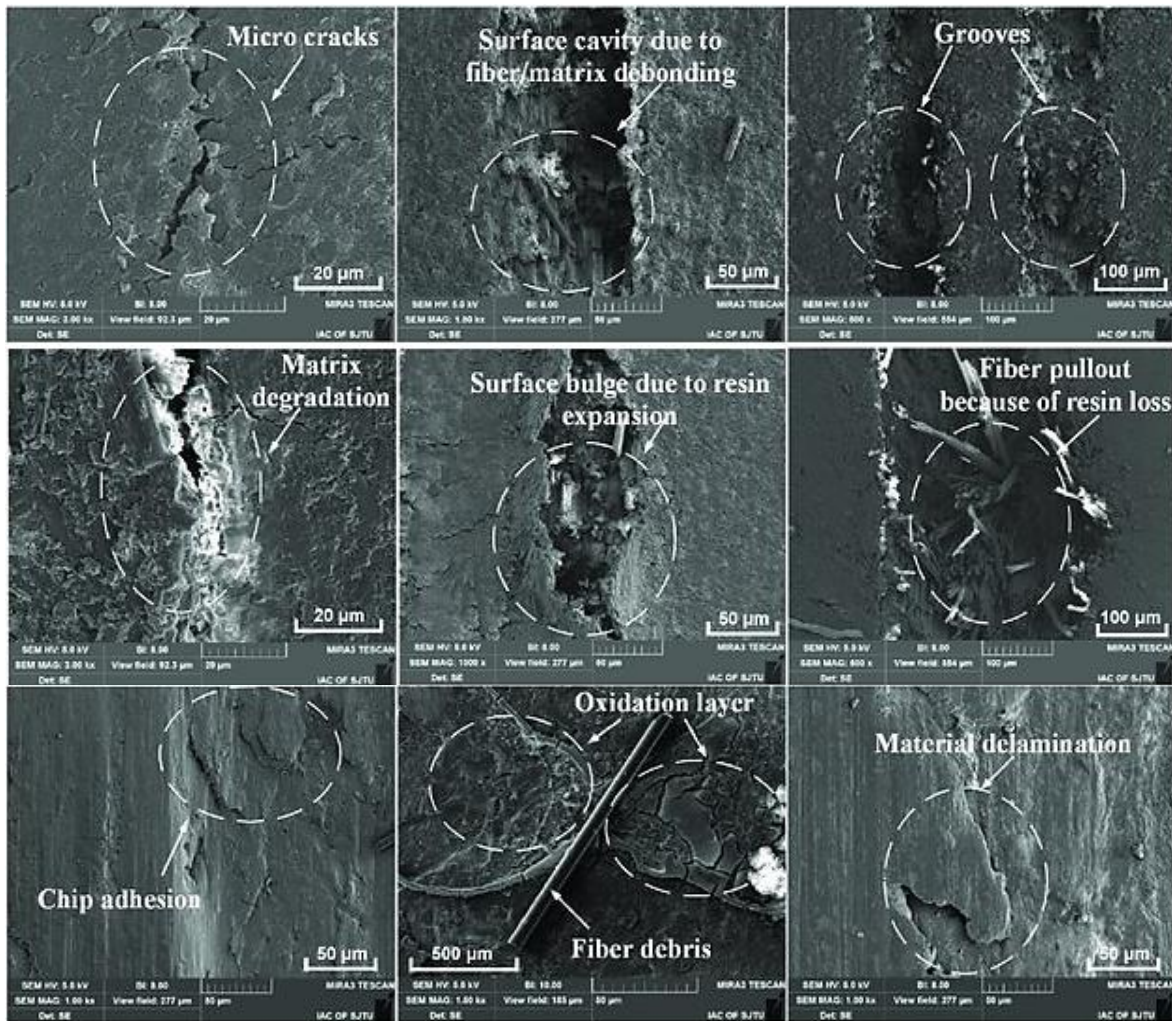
Common defects caused by different machining processes, adapted (17).
